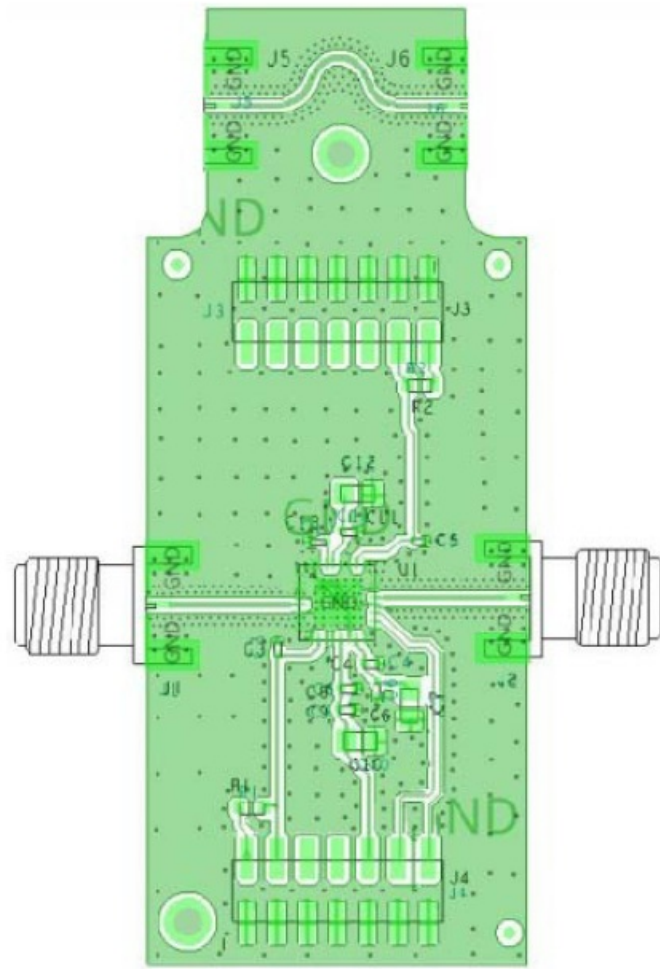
ADPA9007-EVALZ Assembly Drawing (J5 and J6 Are Not Installed)
